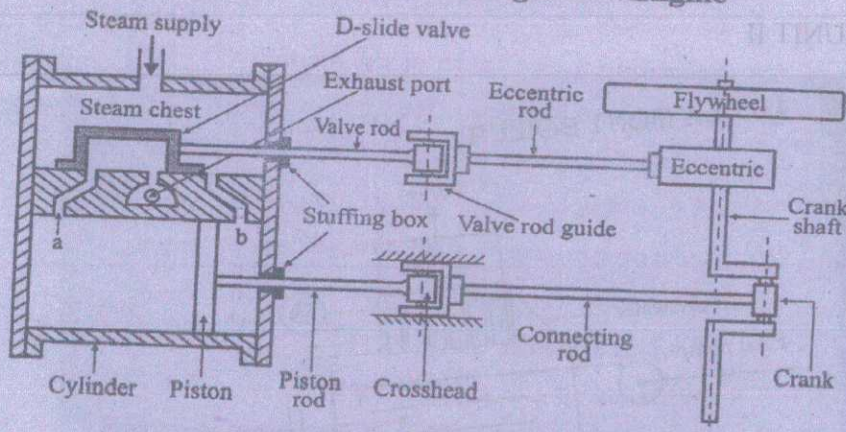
Single Cylinder Double Acting Steam Engine
